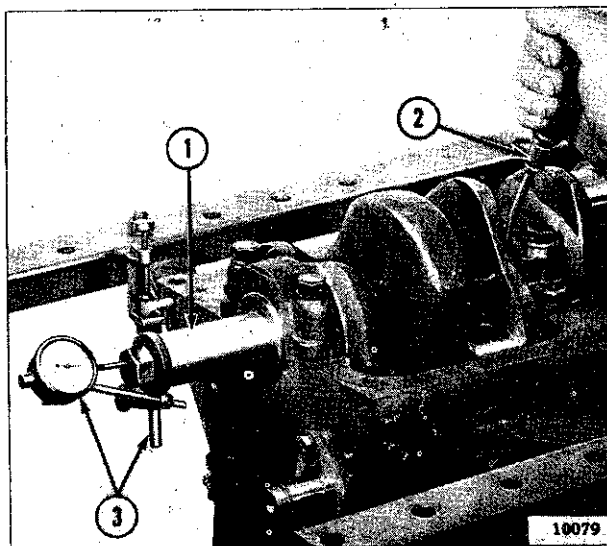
CHECKING CRANKSHAFT END-PLAY
